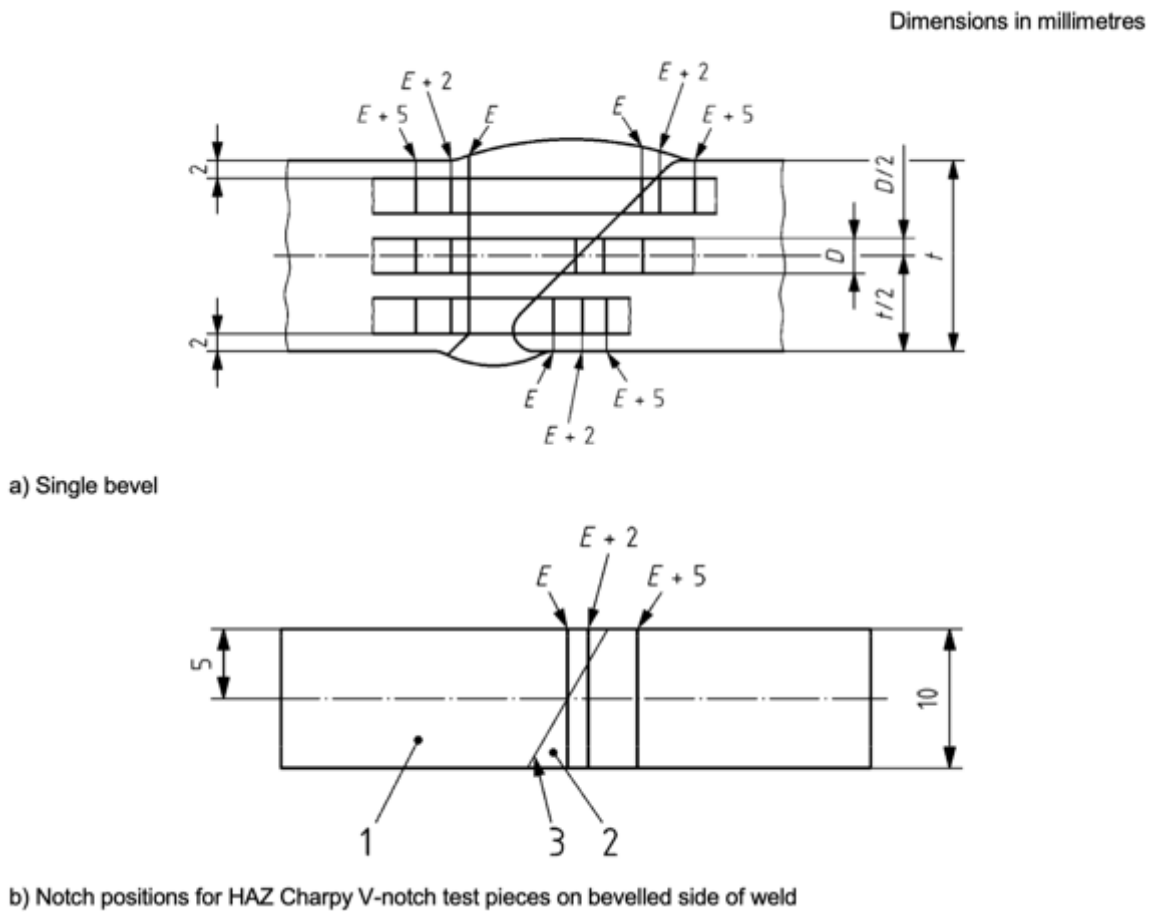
Location of Charpy V-notch impact test pieces for plate butt weld [5]
